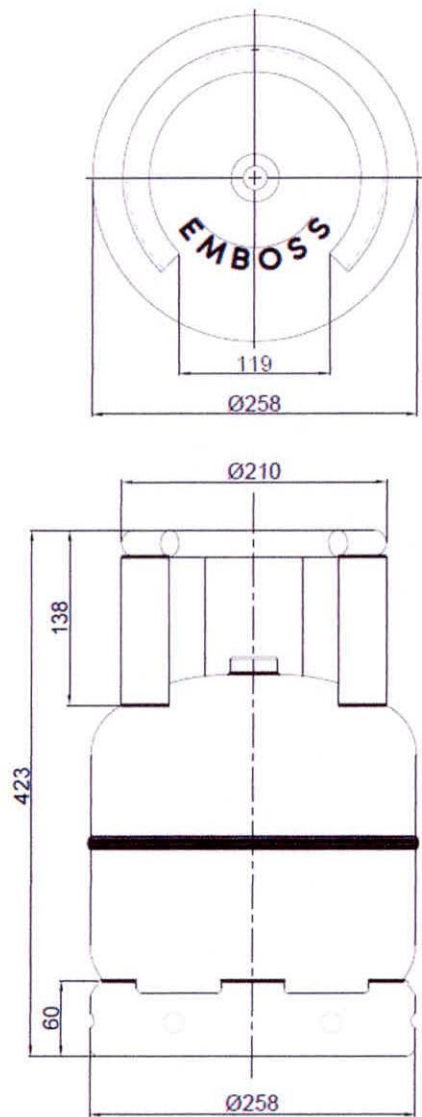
5.0 kg 258 mm diameter assembly details
